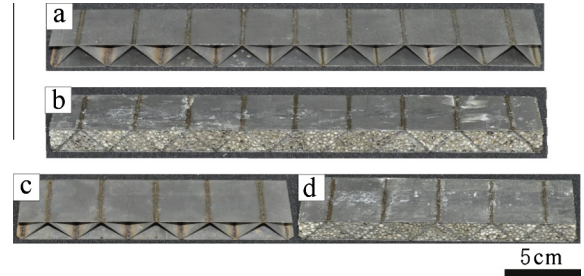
Typical as-fabricated empty and aluminum foam-filled sandwich beams with corrugated cores. Long beam: (a) empty; and (b) filled. Short beam: (c) empty; and (d) filled.
